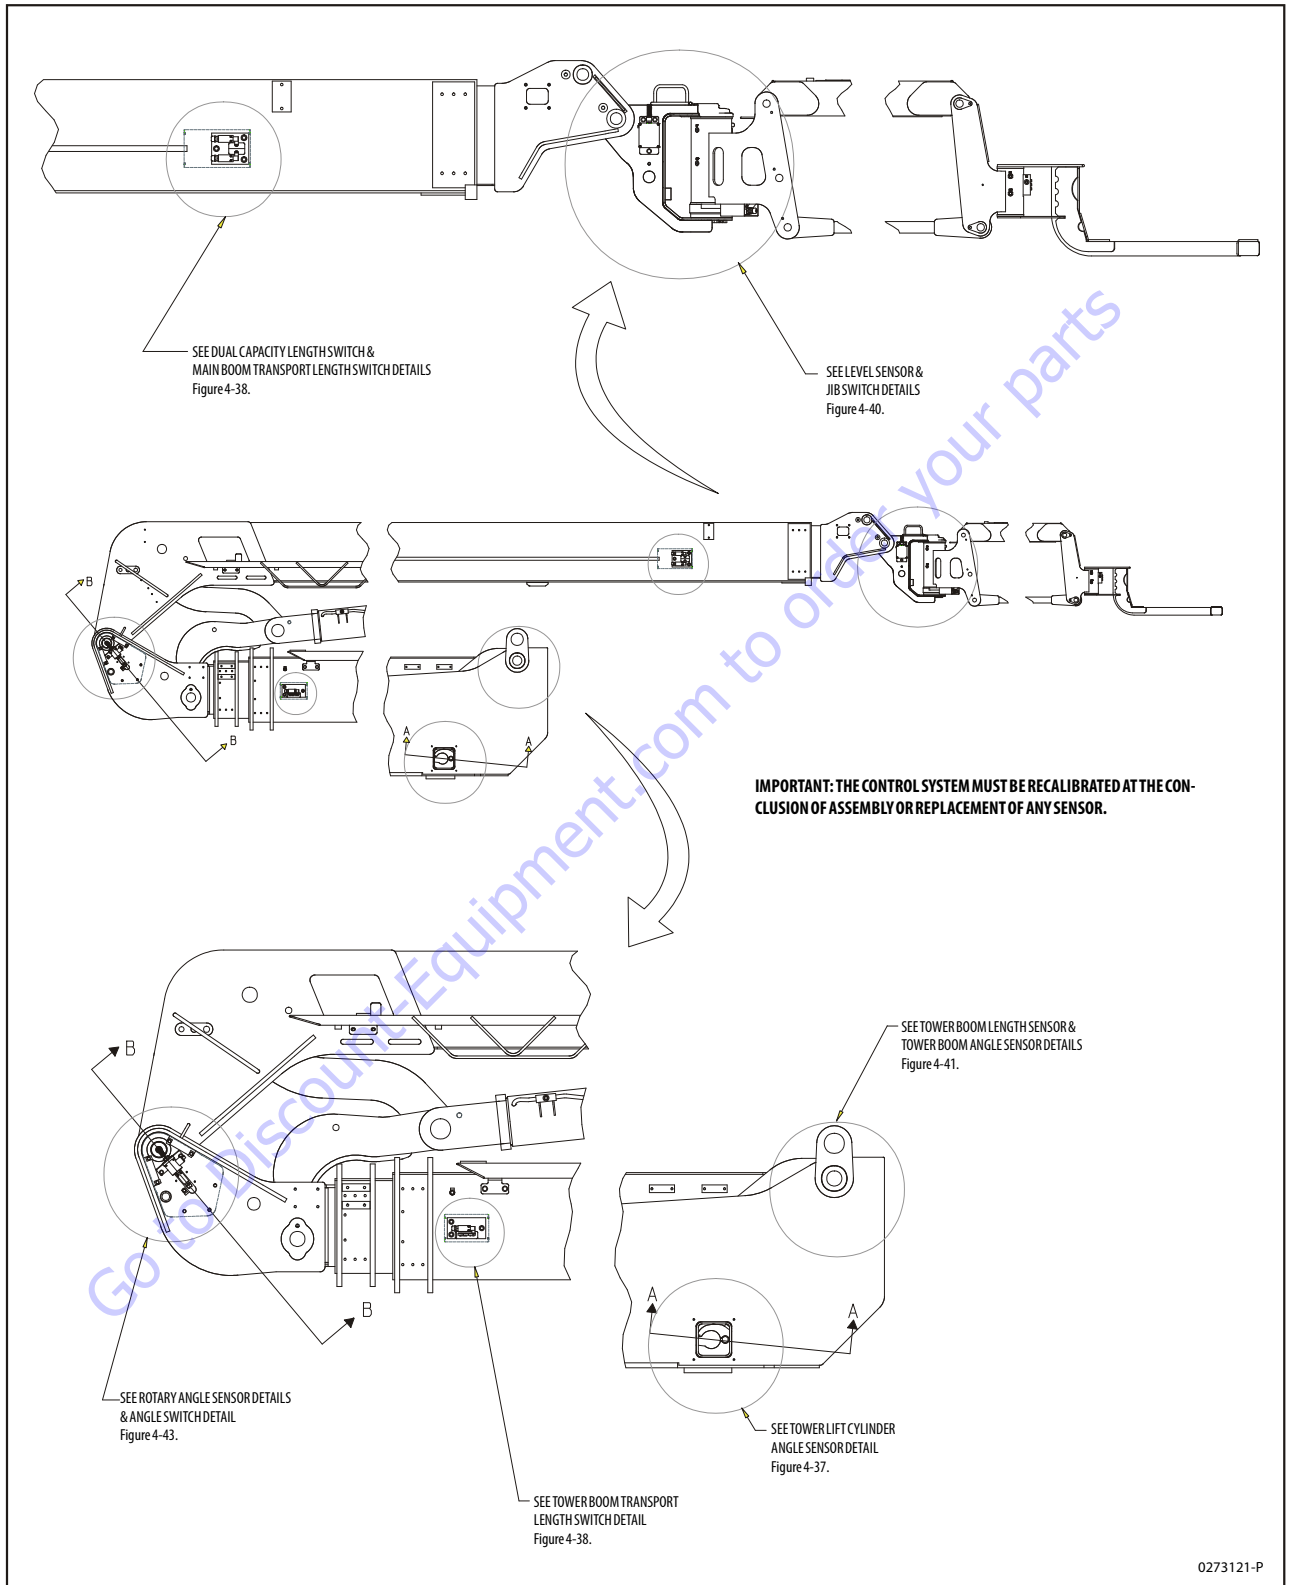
Boom Sensor Locations Overall View - Sheet 2 of 2
